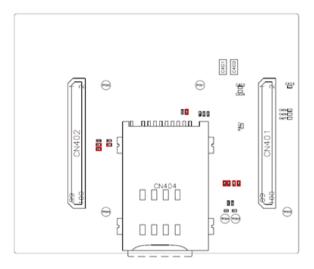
Default Soldering Configuration for Jumpers for the SL80xx Socket Board (Bottom View)
